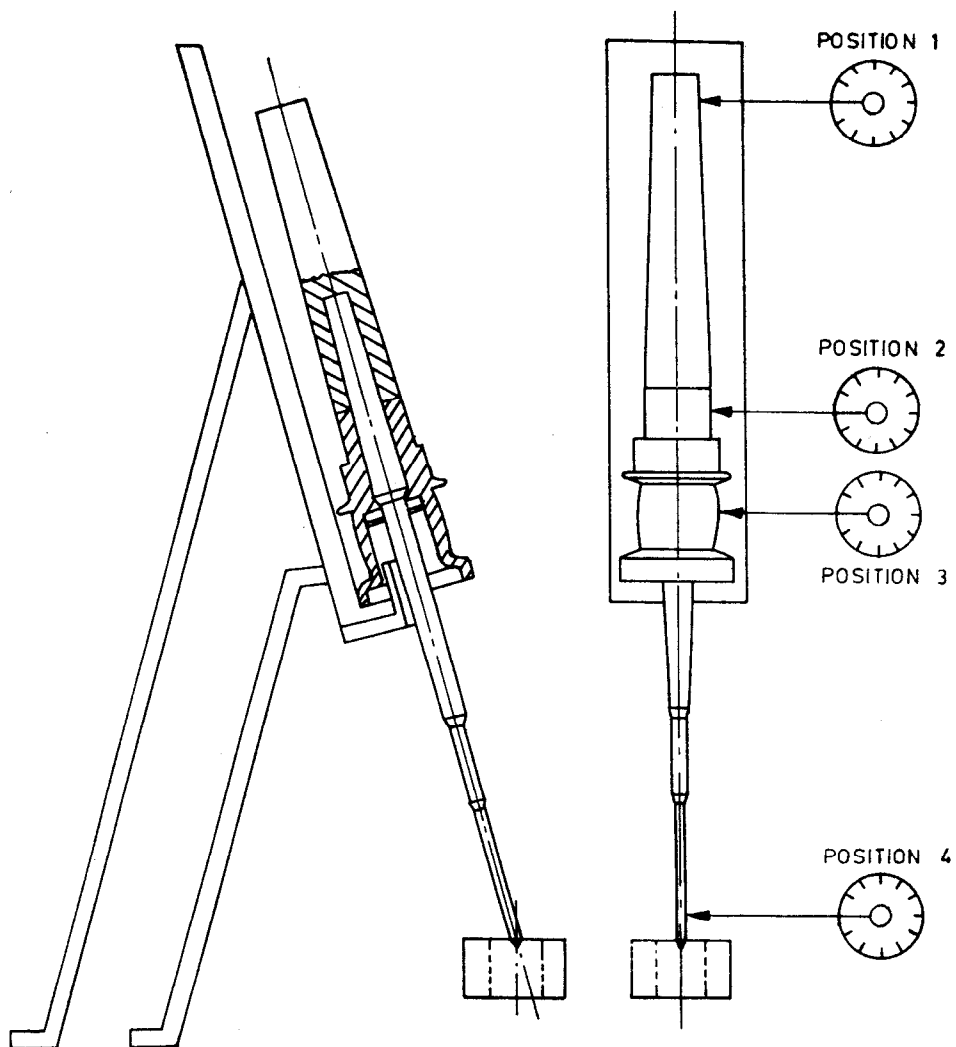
ASSEMBLY FOR THE TESTING OF TRUENESS OF SPINDLE
